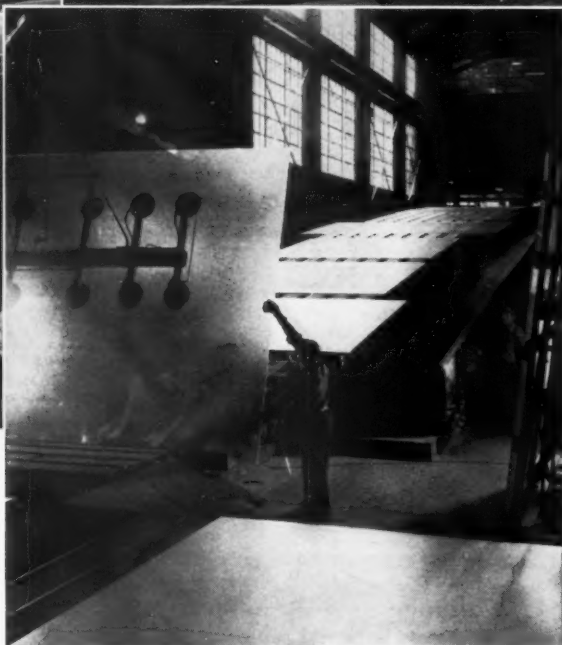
(Below) — Cutting window glass to uniform size by an electrically charged mechanism.
